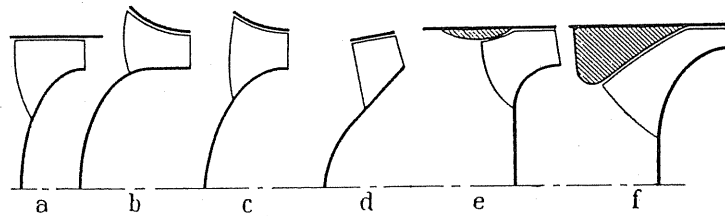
(a-f), possible designs of meridionally accelerated axial impellers. (a) Increasing hub, cylindrical outside casing. (b) Outside casings, diminishing in diameter i.e. nozzle shape constriction, cylindrical internal casing. (c) Nozzle-shaped outside casing with greatly expanding hub. (d) Greatly expanding hub, slight expansion outside casing (inclined blade blower) (e) Greatly expanding hub from cylindrical outside casing at outlet and bulge-shaped constriction at inlet. (f) Design as (e) but inlet bulge drawn further inwards (high-pressure impeller).
